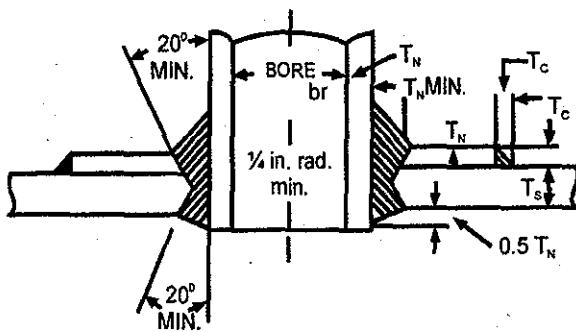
MINIMUM WELD ATTACHMENT FOR STANDPIPES OVER 5 IN. BORE REQUIRING COMPENSATION PLATES
